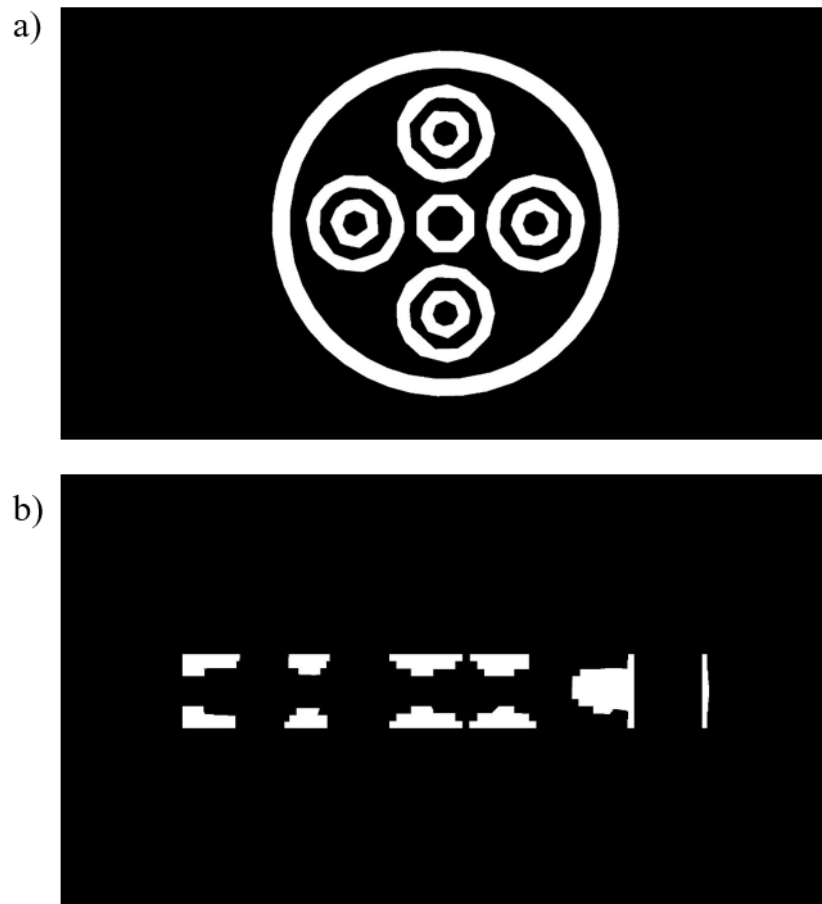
Sample machine instructions that would be sent to produce a layer on a DLP style SLA printer for a) example 1 and b) example 2.
